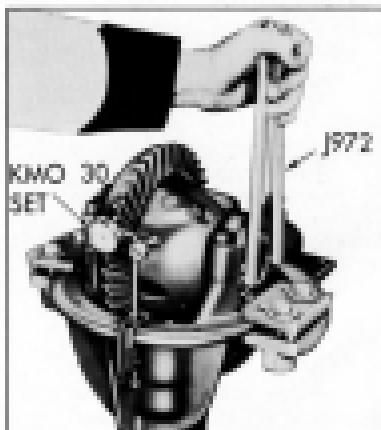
Adjusting Differential Side Bearing Caps and Checking Backlash
